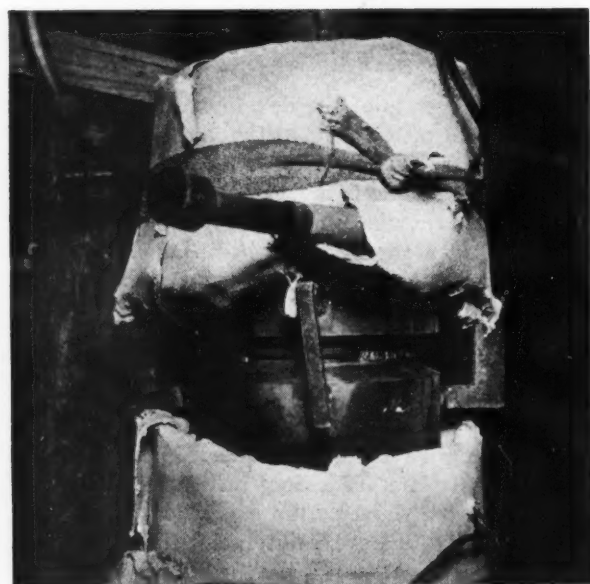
Joint in 10-in. vertical high-pressure steam pipe, prepared for welding
